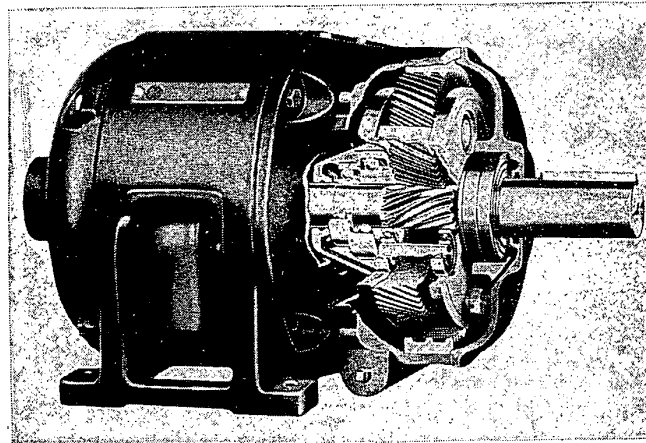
Planetary gear as part of a geared motor. (Courtesy of General Electric Co., Paterson, N. J.)
